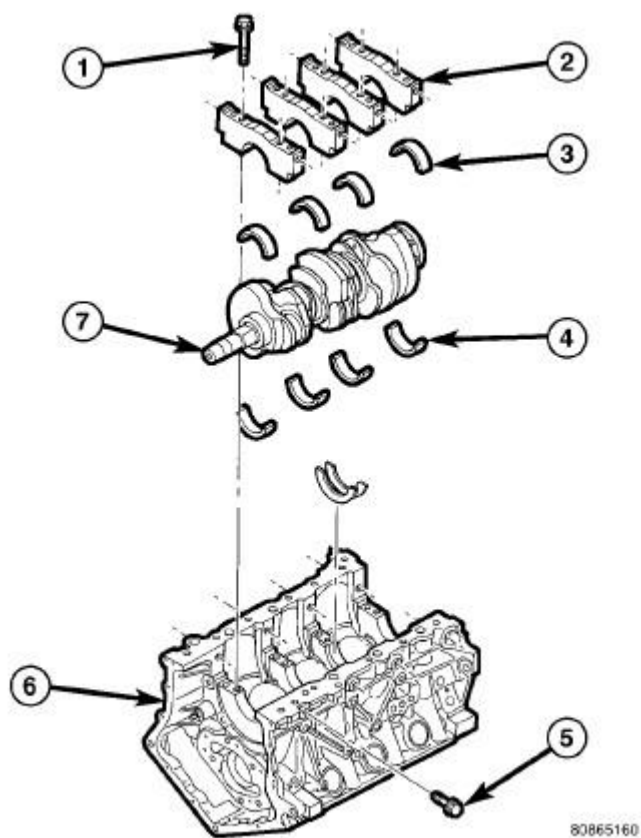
CYLINDER BLOCK AND CRANKSHAFT
